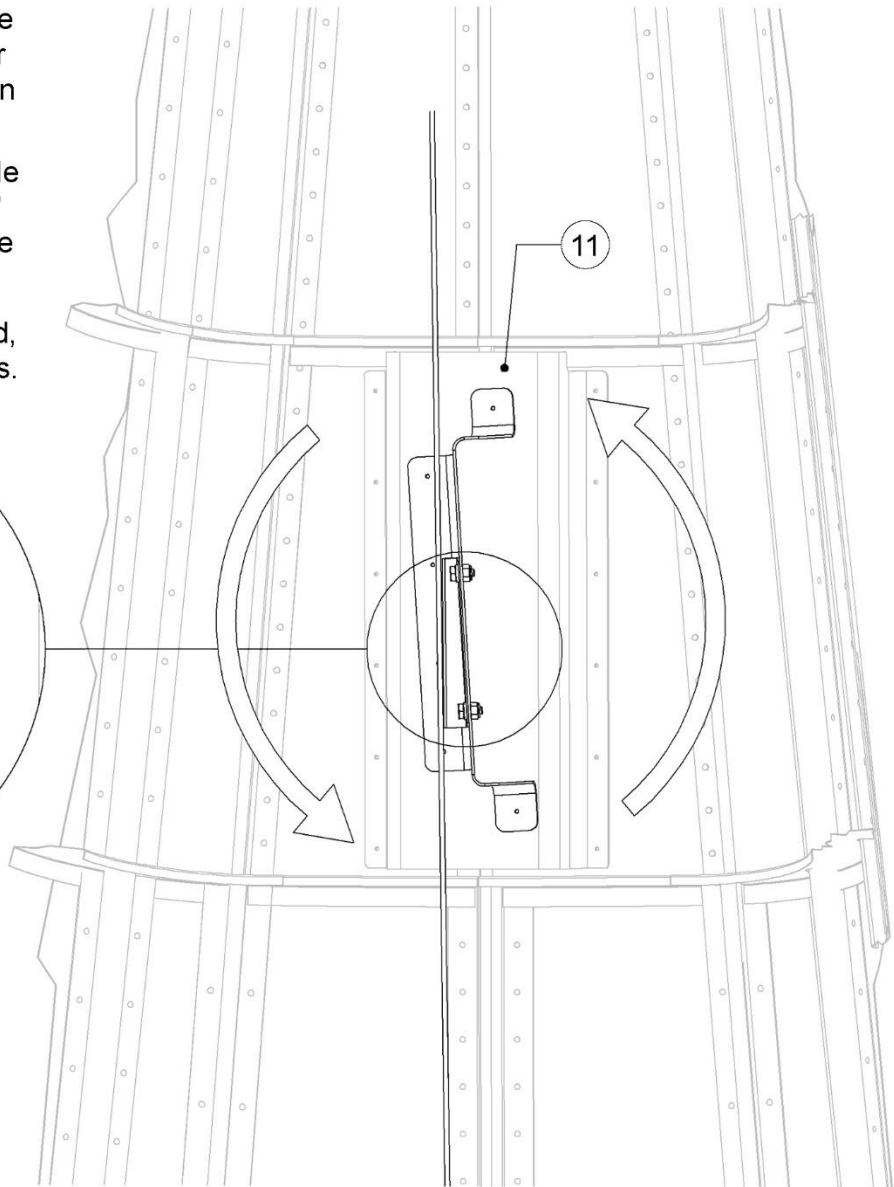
Positioning Pitch Servo Riser Bracket Assembly
